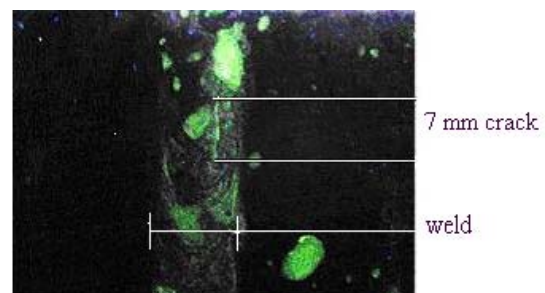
Photograph of the crack developed in Specimen A1 under magnetic particle testing and UV light.
